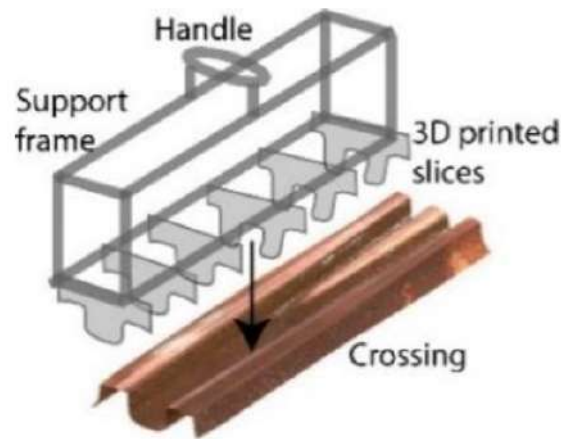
Schematic of modular tooling approach: handheld structure fits several 3D printed measuring templates.
